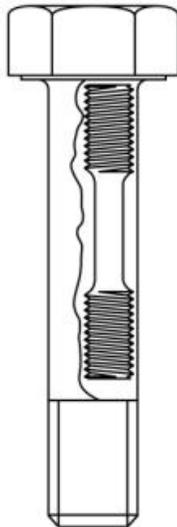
Location of Standard Round 2-in. Gage Length Tension Test Specimen When Turned from Large Size Bolt
